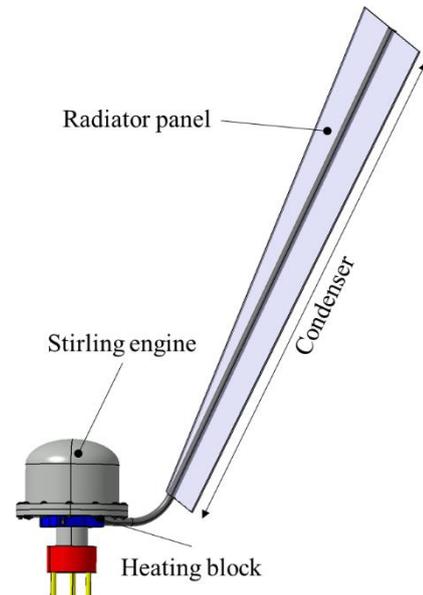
Configuration of Stirling engine and heat pipe radiator assembly.
